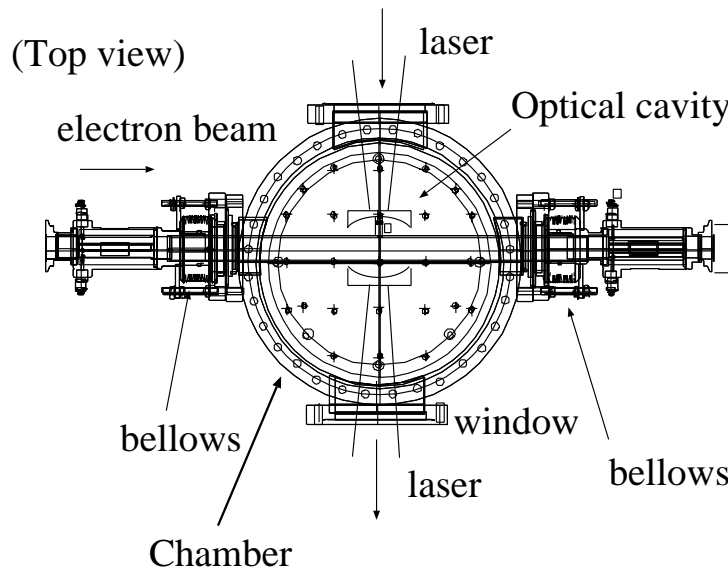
The laser wire vacuum chamber. The optical cavity is installed inside the vacuum chamber.
